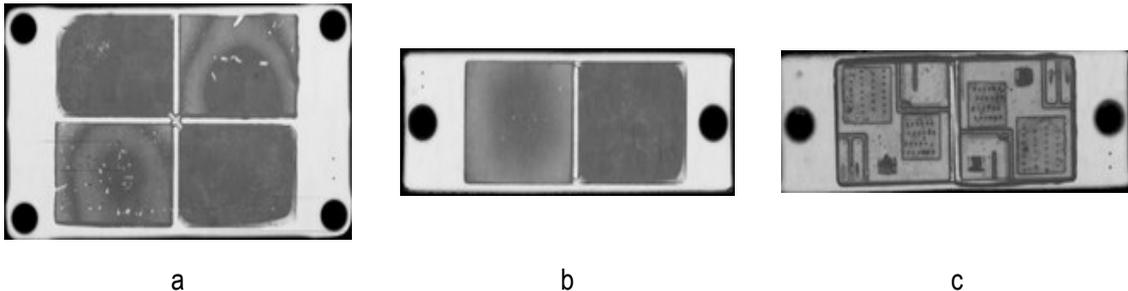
Images received with the acoustic microscope: a – soldering of a MIAA type module, b – soldering of a MIFA type module, c – wire welding of a MIFA type module.
